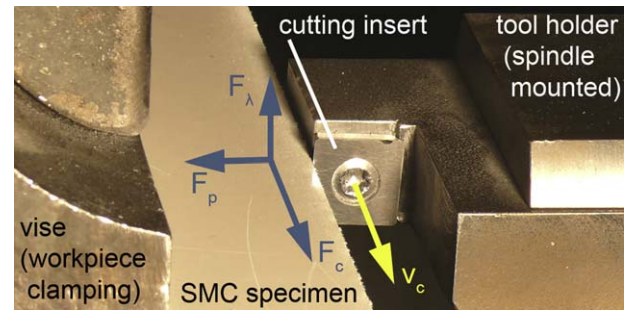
Experimental setup: clamped SMC specimen, cutting insert during the cut, direction of the measured process forces.
